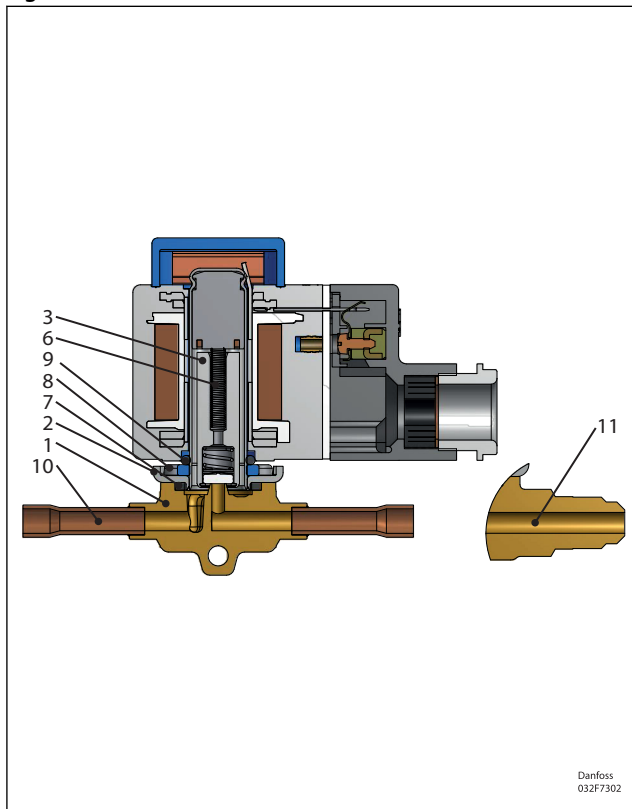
EVR 4 - EVR 6 - EVR 8 Solder and flare connection
